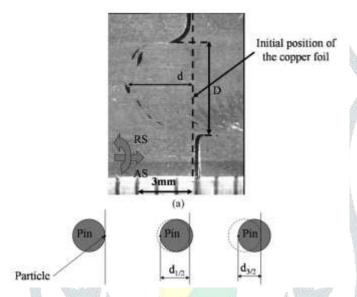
Illustrates a transverse copper foil is used to make a macro-section parallel to the plan section of the weld joint at the weld root [10].
